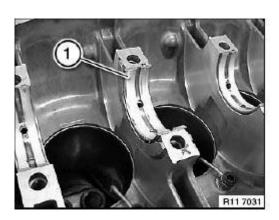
Attaching Special Tool (11 4 251) To Screw Connection On Main Bearing Courtesy of BMW OF NORTH AMERICA, INC.
